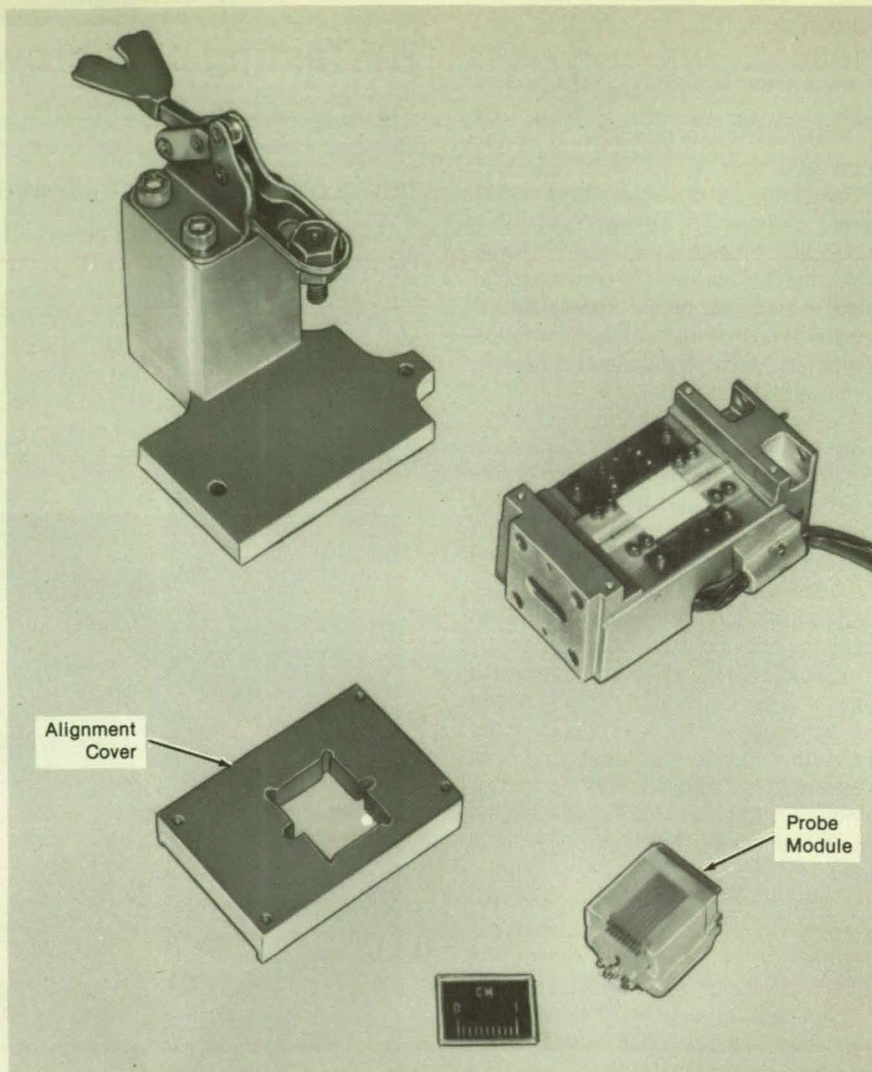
This K-Band Fixture is used to test packaged components of a 20-GHz MMIC transmitter. The alignment cover guides the probe module onto the MMIC.
